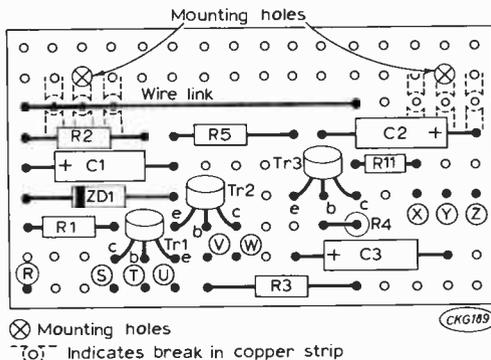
The component layout on Veroboard. The only breaks in the copper strip are those near the mounting holes.
